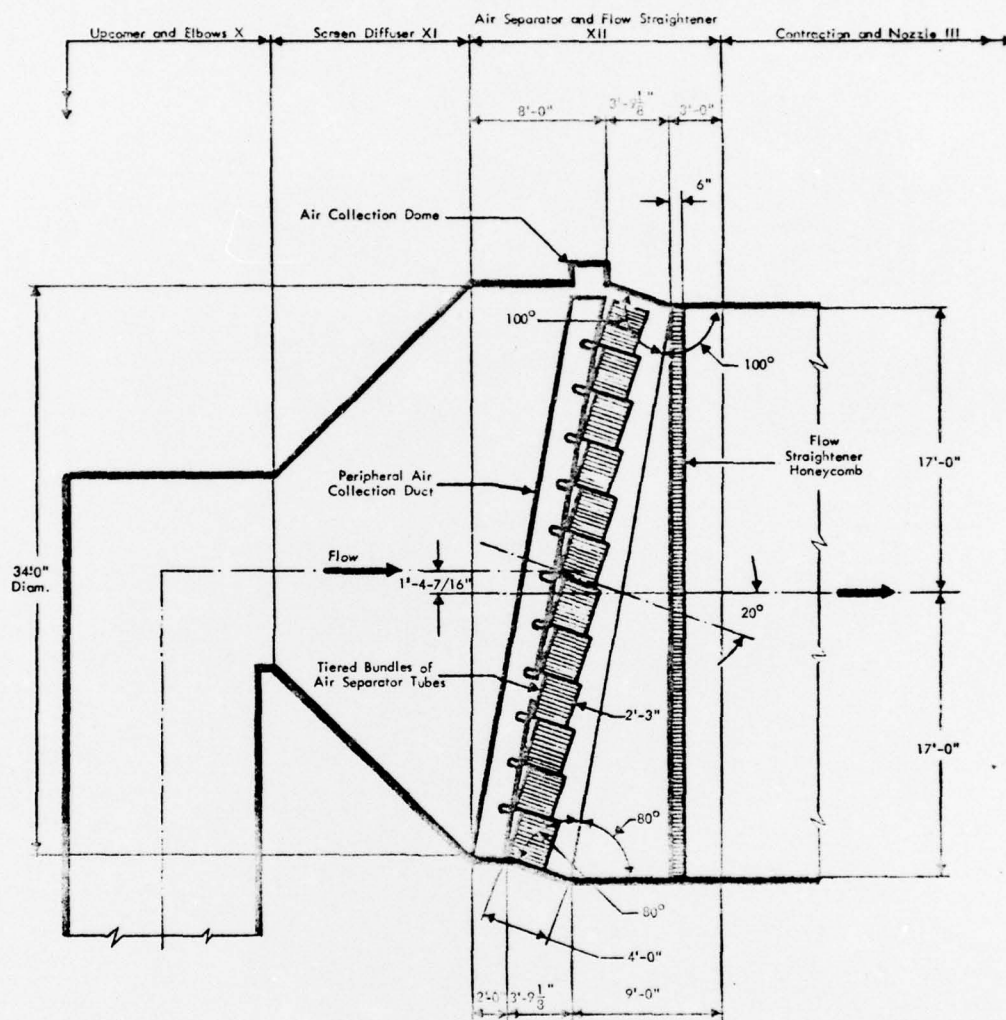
The Air Separator and Flow Straightener Configuration (all dimensions relate to prototype inside flow surfaces)
